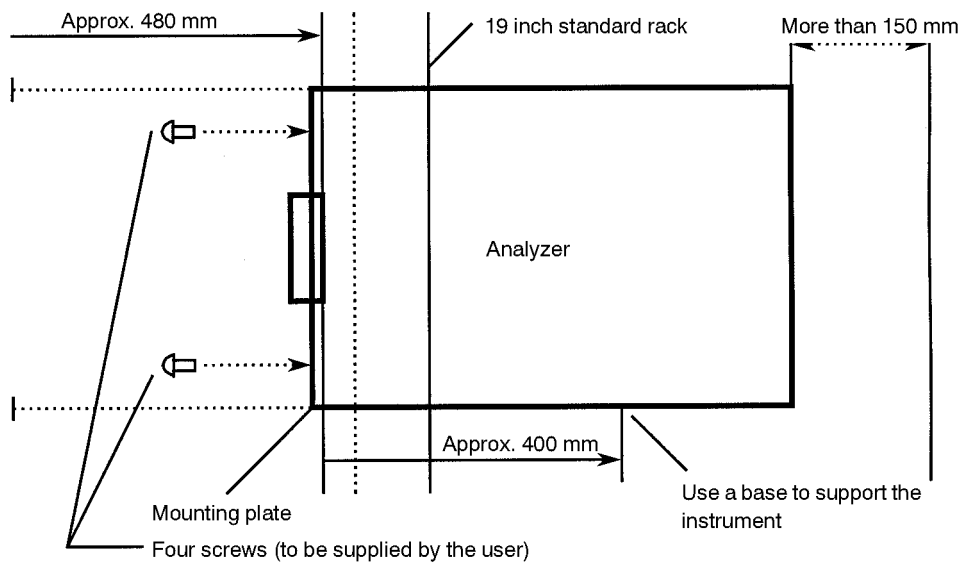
Mounting the APSA-H370 on a 19-inch rack
